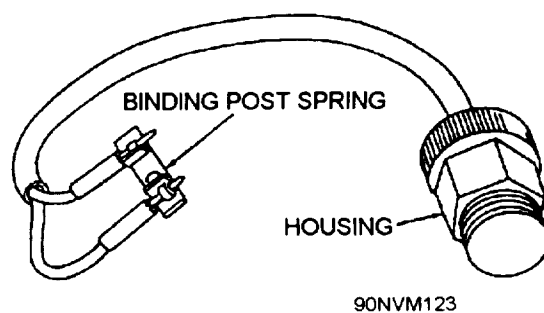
Mk 19 Mod 1 explosive fitting.
